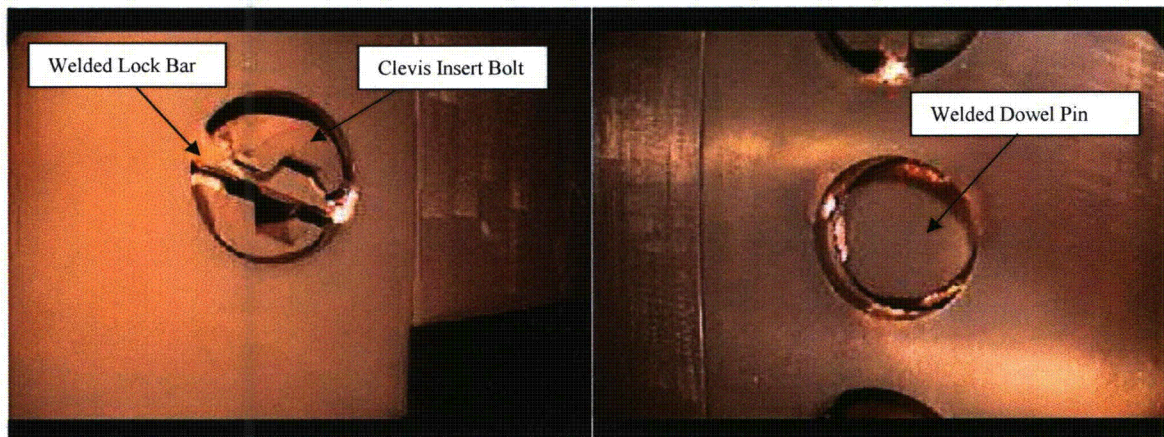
Typical condition of broken bolt (left). Broken dowel pin tack welds (right)
